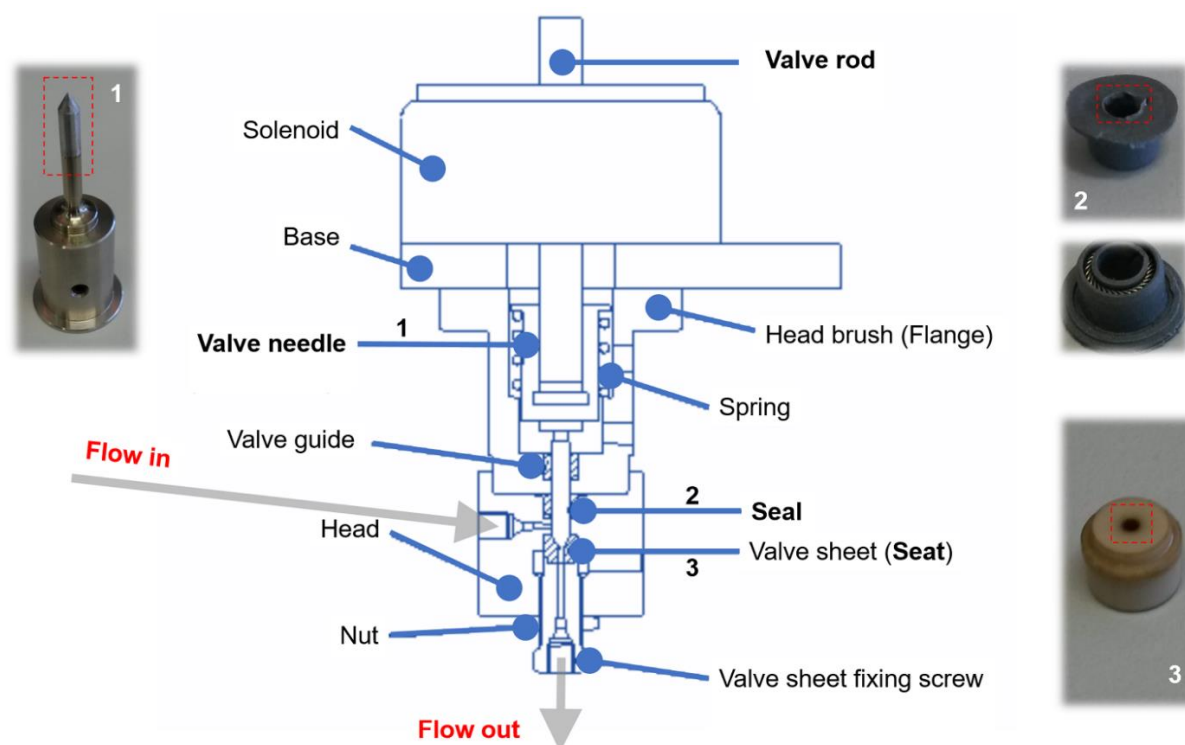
Cross section view of the Jasco back pressure regulator (BPR)
